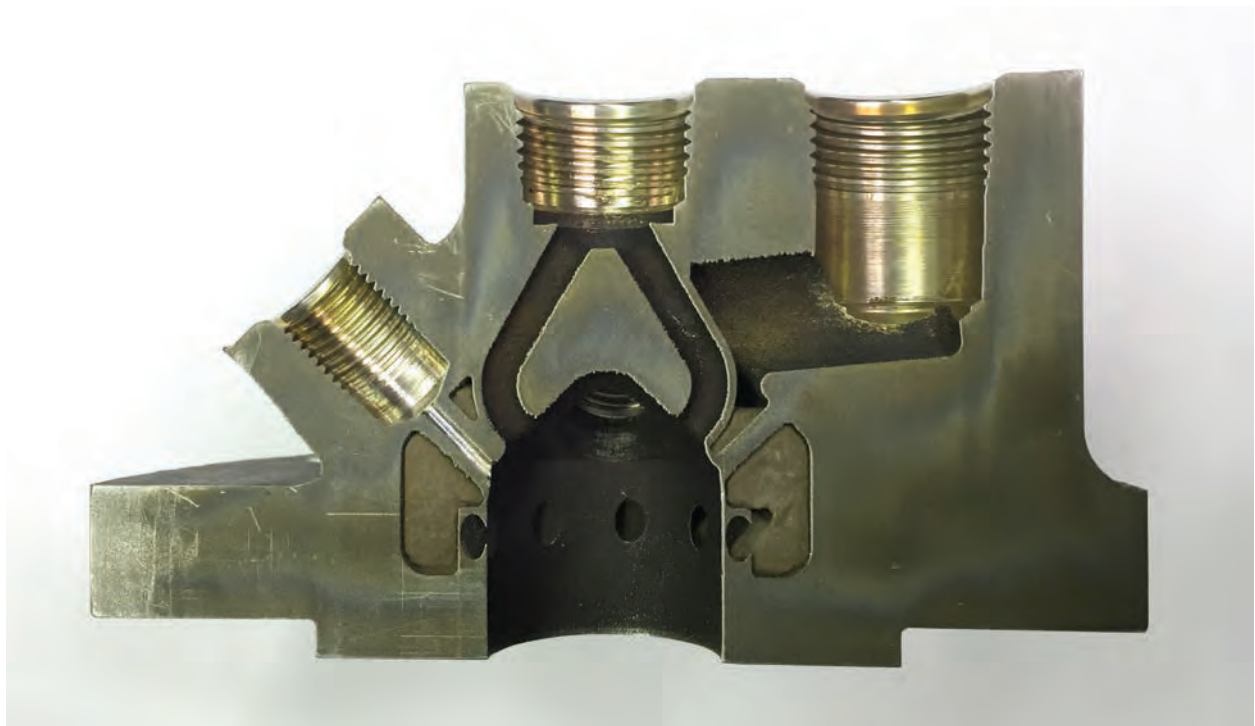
AM engine component. Internal chamber became plugged following HIP treatment without proper AM powder removal.
